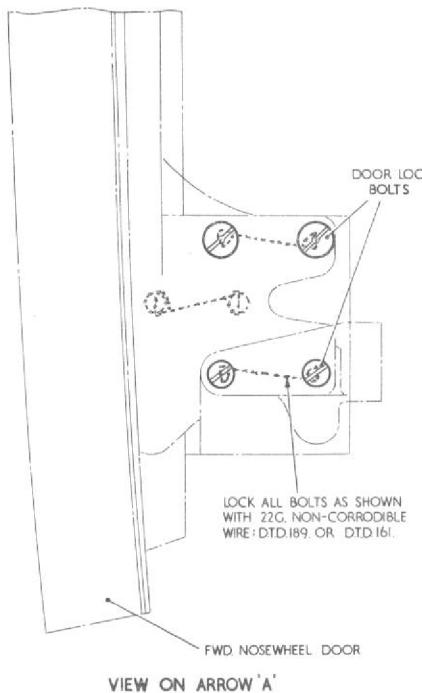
Wire locking of bolts at forward nose wheel door locks
